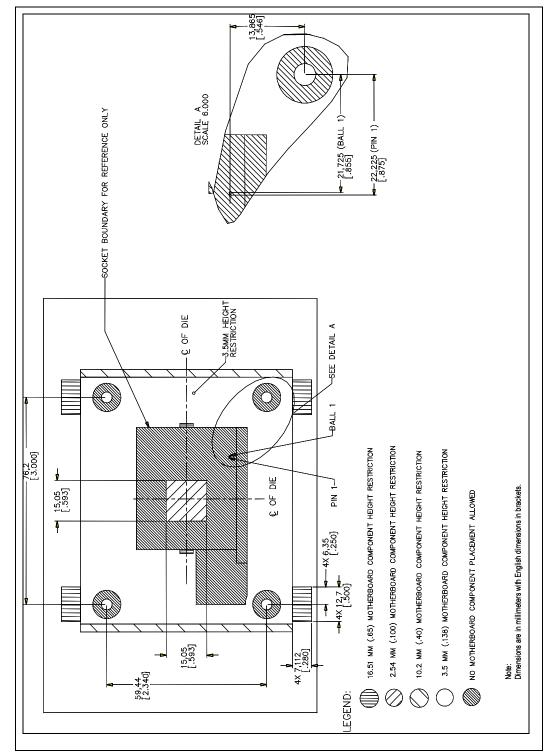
Retention Mechanism Keep-Out Drawing 1
